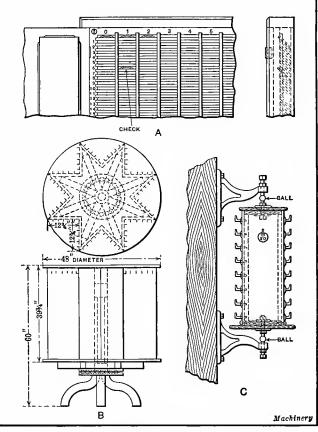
Three Forms of Check Boards or Cabinets for Tool Supply Rooms
